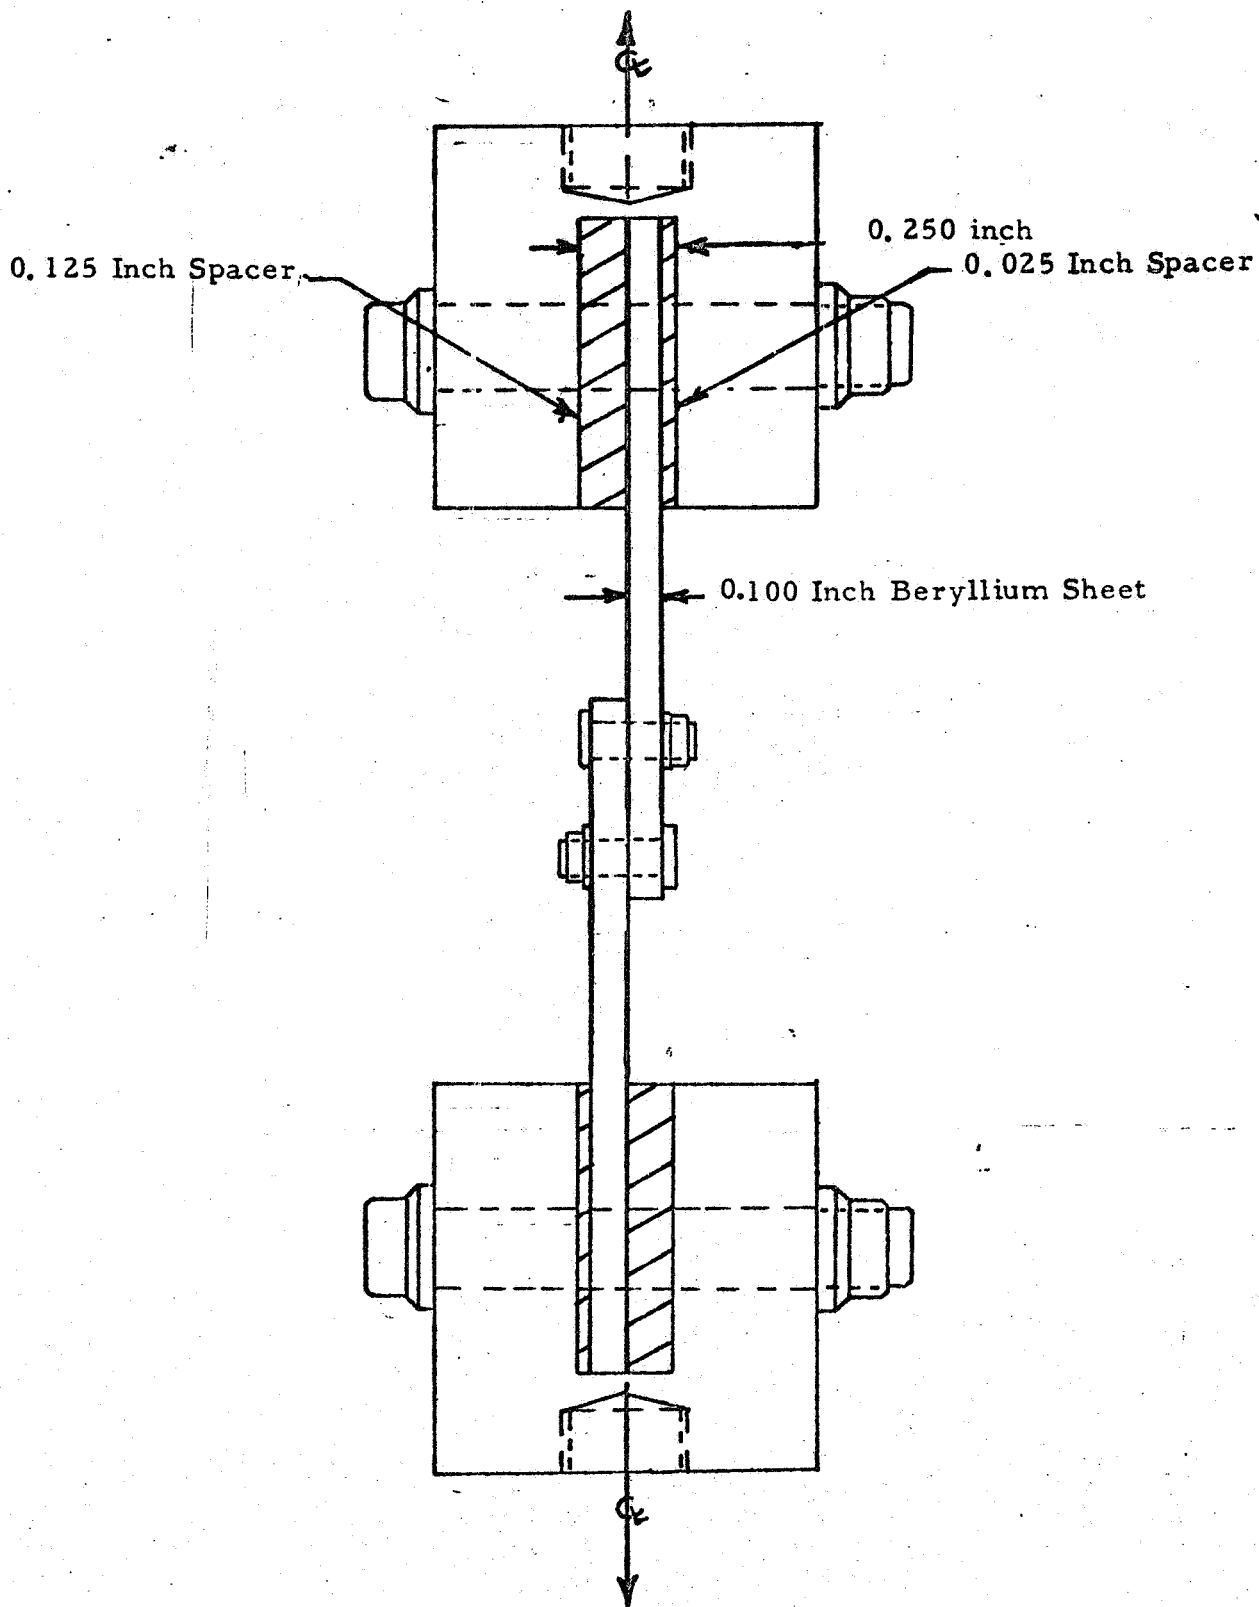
Test Set-up For Beryllium Lap Joint Shear Test
